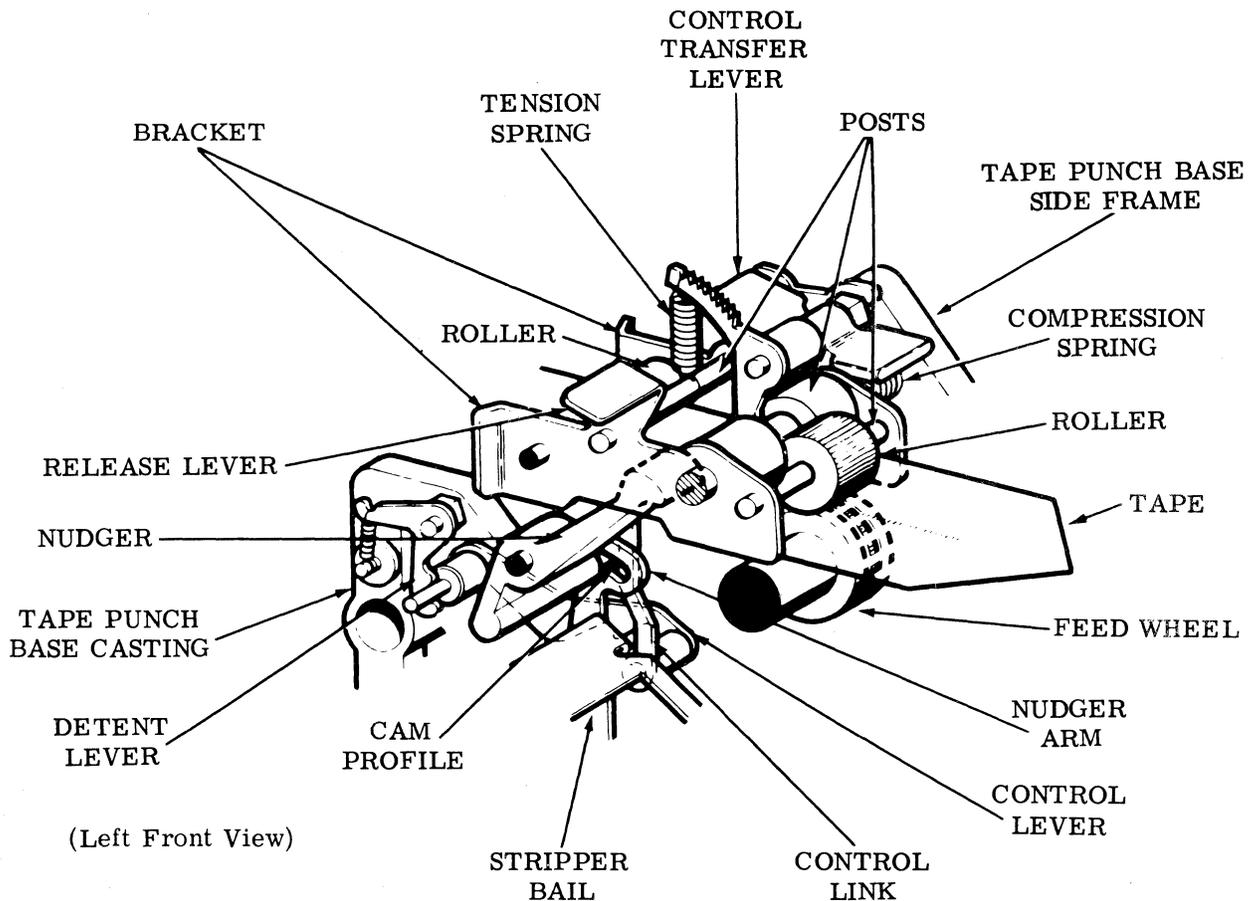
Tape Guide Assembly (Tape Feed Mechanism)
